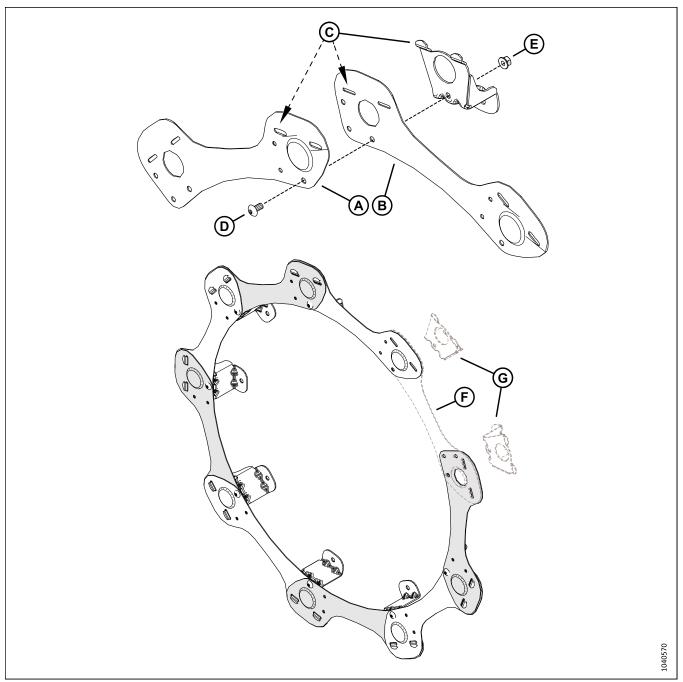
Nine-Bat Reel – Initial Endshield Assembly
